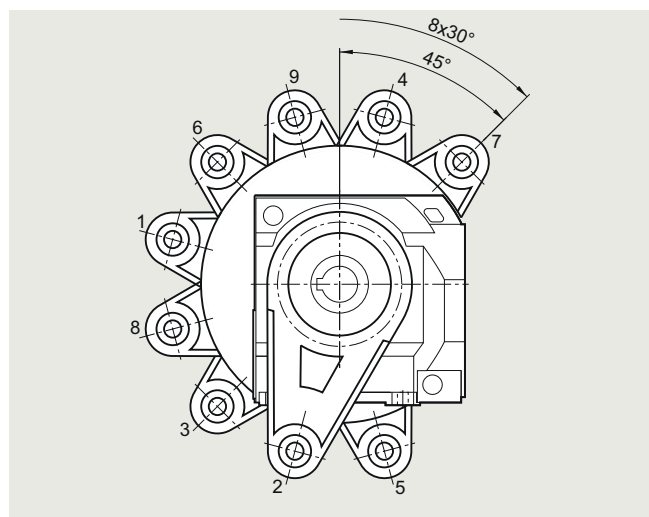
/11 Helical worm gearboxes CAD., Figure 2, sizes 39A to 89
